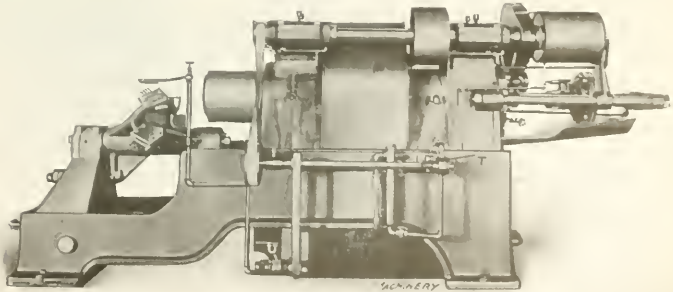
Rear View of Warren Lathe showing Pumps for delivering Lubricant to Bearings and Tools
